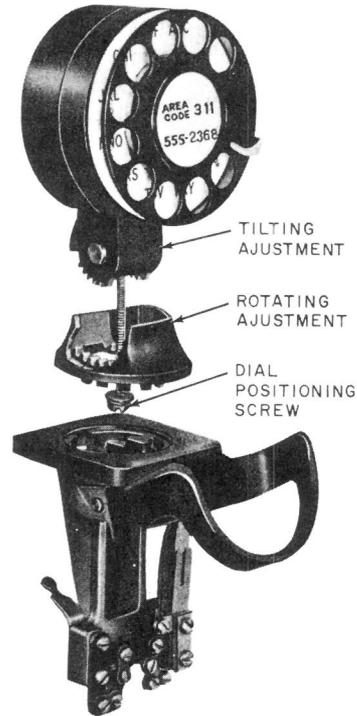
Positioning Adjustments of 43A Dial Mounting
